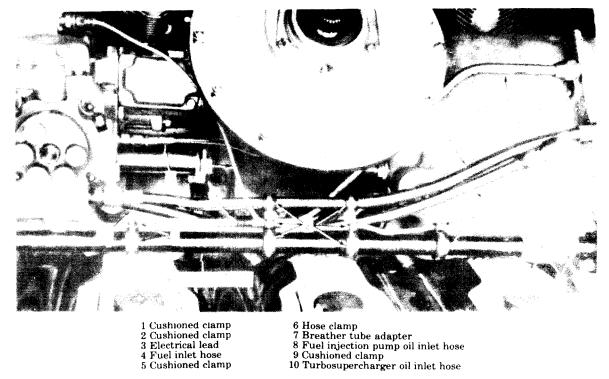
Removing or installing electrical lead, crankcase breather tube, injection pump oil inlet hose, turbosuper oil inlet hose and fire extinguisher tube, model AVDS-1790-2DR engine.
